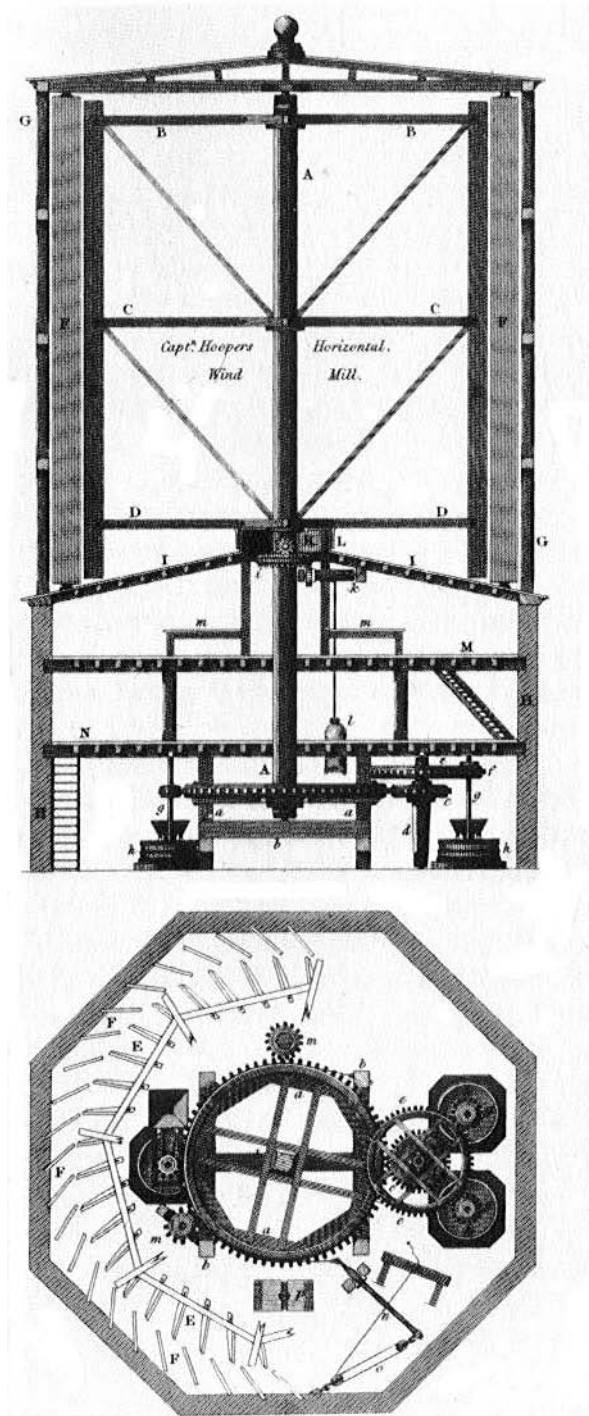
Stephan Hooper vertical wind mill design, 1816.
